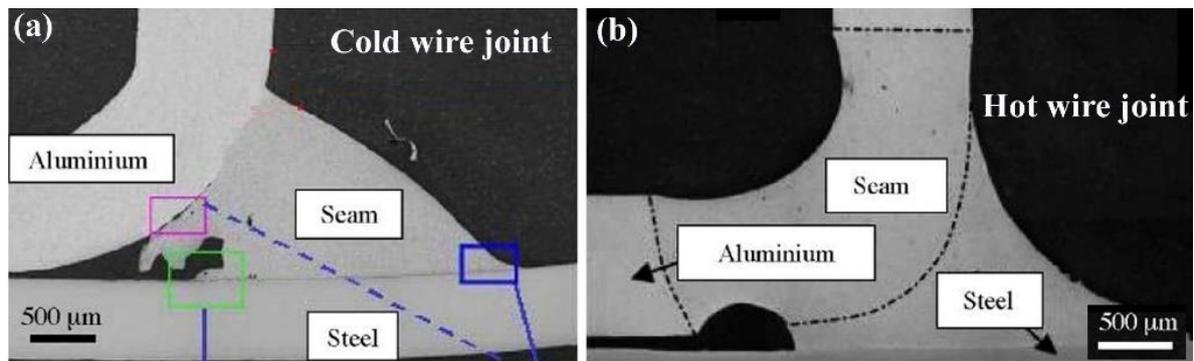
Cross-section showing the steel to aluminium joint (a) cold wire (b) hot wire filler [44].
